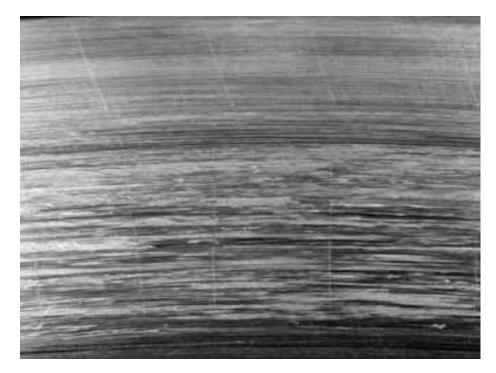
Smearing damage on the face of a bearing ring. Note the incipient transverse cracks
